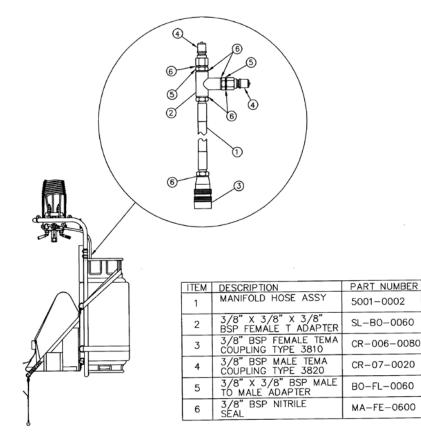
FUEL MANIFOLD ASSEMBLY
